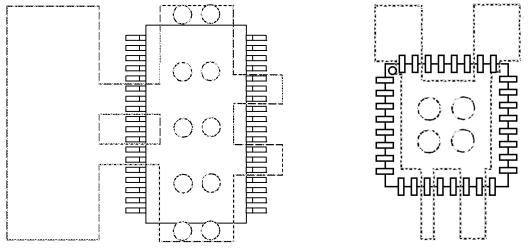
Example of SSOP-36 and QFN32 PCB Ground Plane Layout. Preferred layout at top and bottom connected with through-hole filled vias
